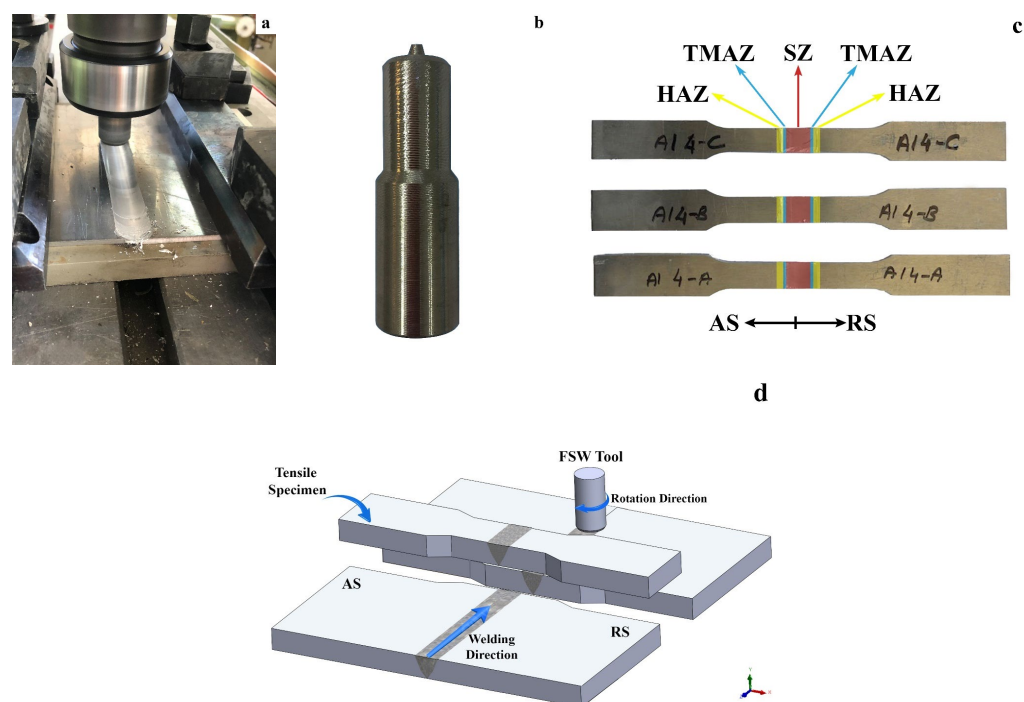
(a) The image of FSW operation. (b) The tapered pin tool used in this study. (c) Tensile test specimens and the welding zone on them. (d) Schematic view of FSW operation and tensile test specimen.
